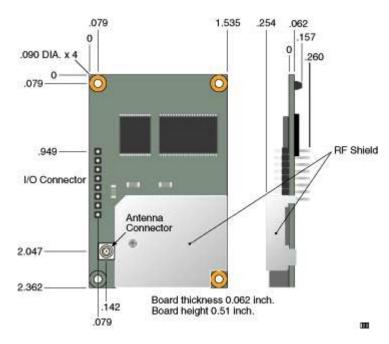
G8 Version 3, OEM Board Dimensional Drawing Top View and Side View
